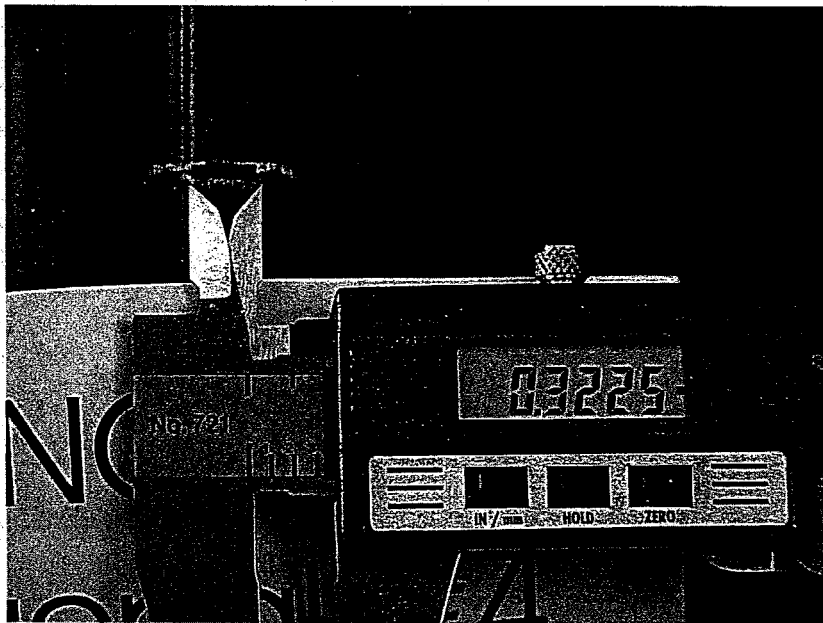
Close-up View of Notch after Test Under 24 H Igepal for Bound Hancor 36 Specimen 4
